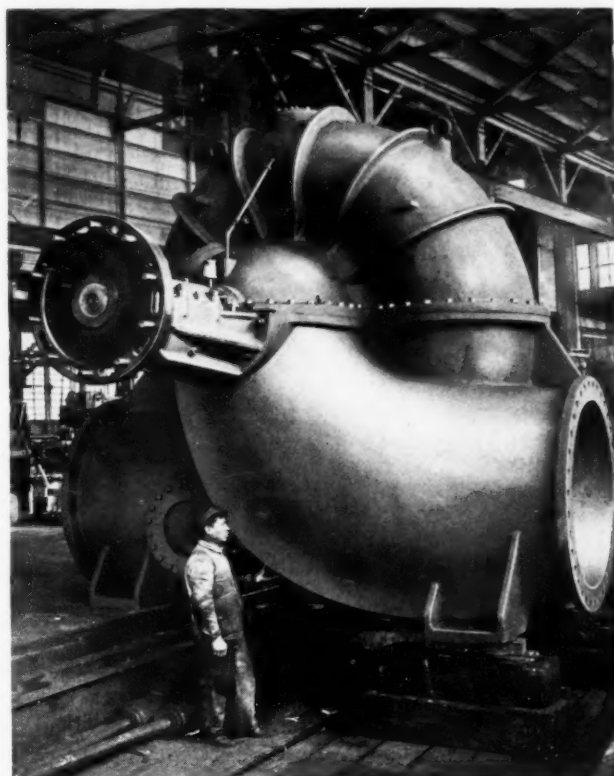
MODERN 50-IN. DOUBLE-SUCTION PUMP
